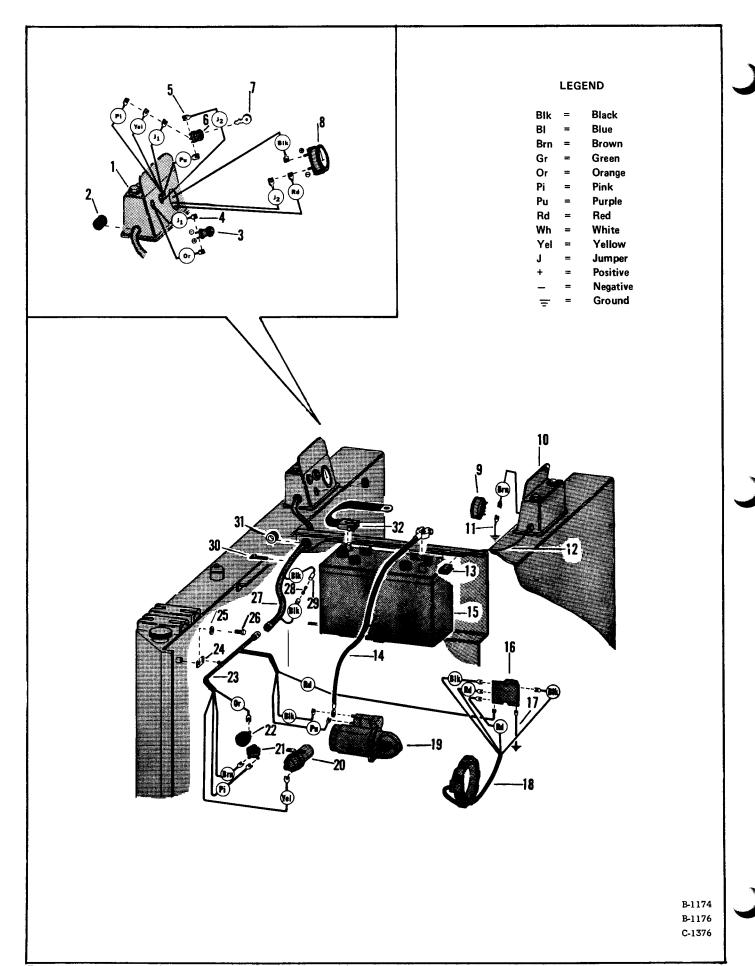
Electrical Circuitry (Rectifier - Regulator Module, One Unit) (M-600)
